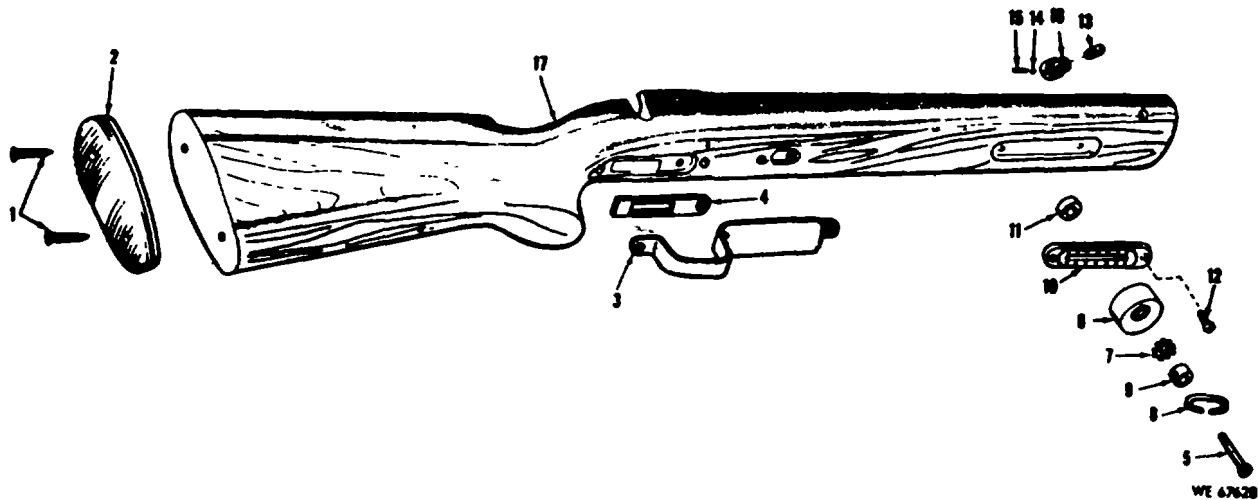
Stock assembly for Caliber .22 Remington Rifle, Model 40X-H1 - exploded view.
